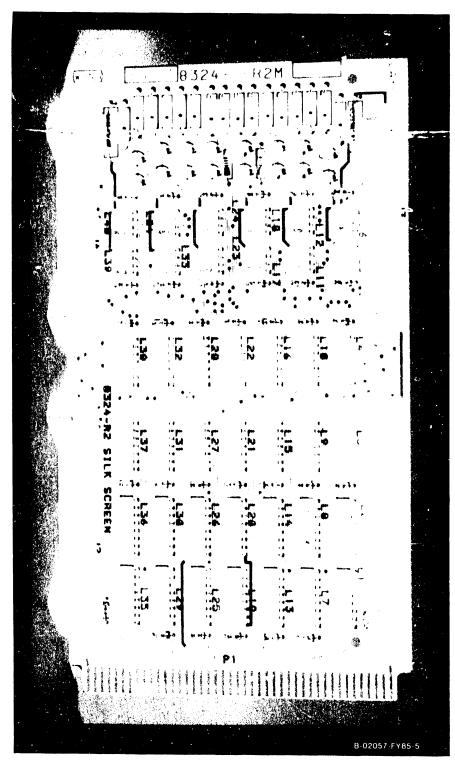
Line Driver/Receiver Daughter Board 210-8324
